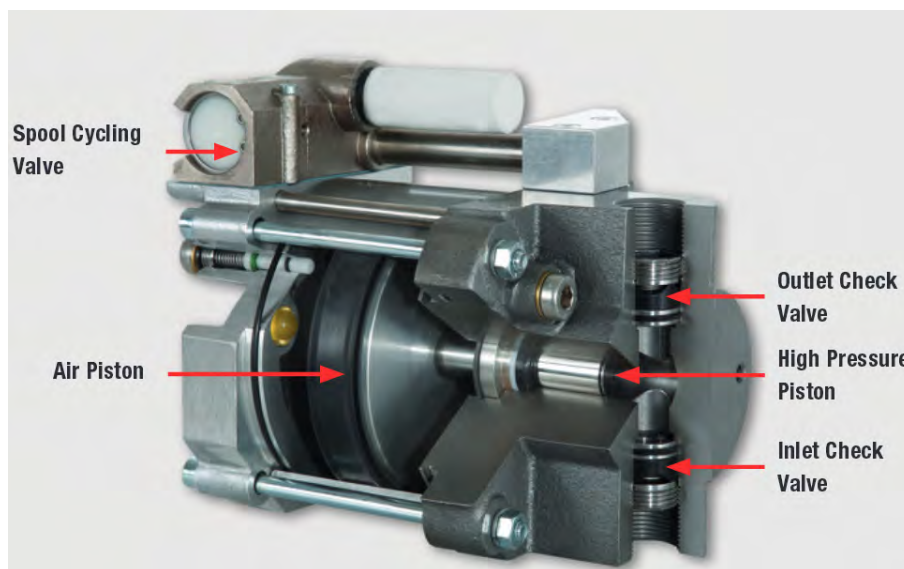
Cutaway view of a Maximator hydraulic intensifier [37].
